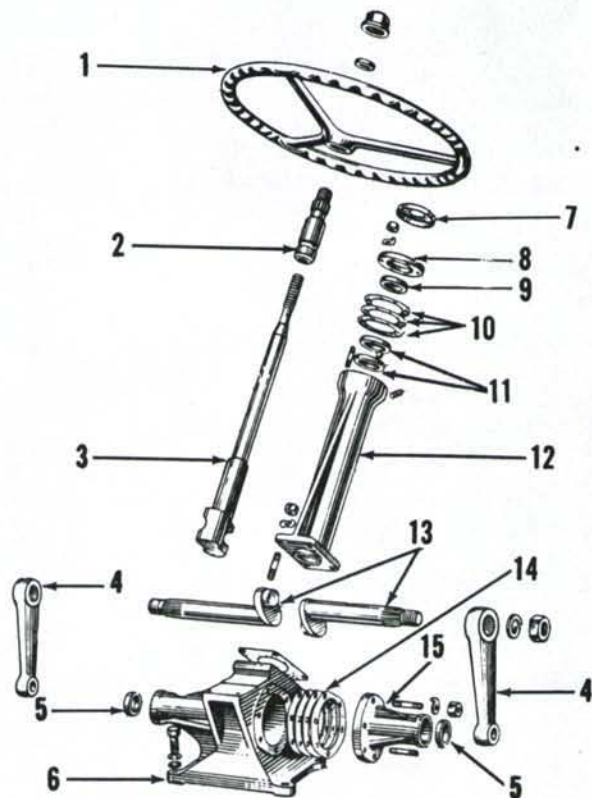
Exploded view of worm and nut type steering gear. Rotary movement of the main nut (2) moves the worm shaft (3) vertically, rotating the two rocker shafts (13) in opposite directions.
